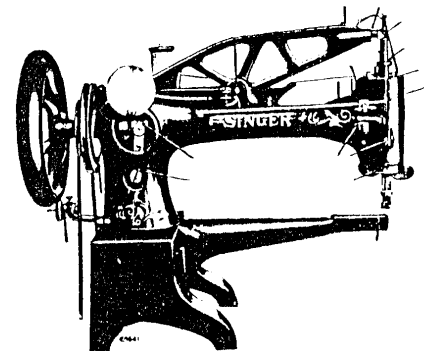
REAR VIEW OF MACHINE SHOWING POINTS TO BE OILED
